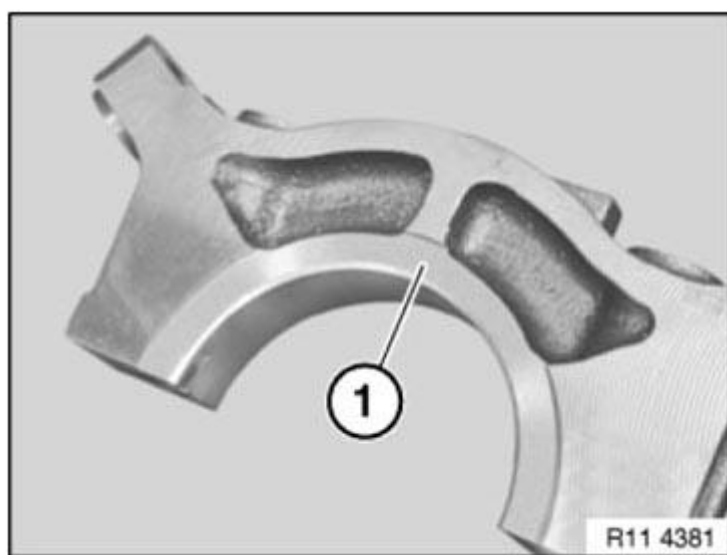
Identifying Main Bearing Cap Thrust Washers Surfaces
